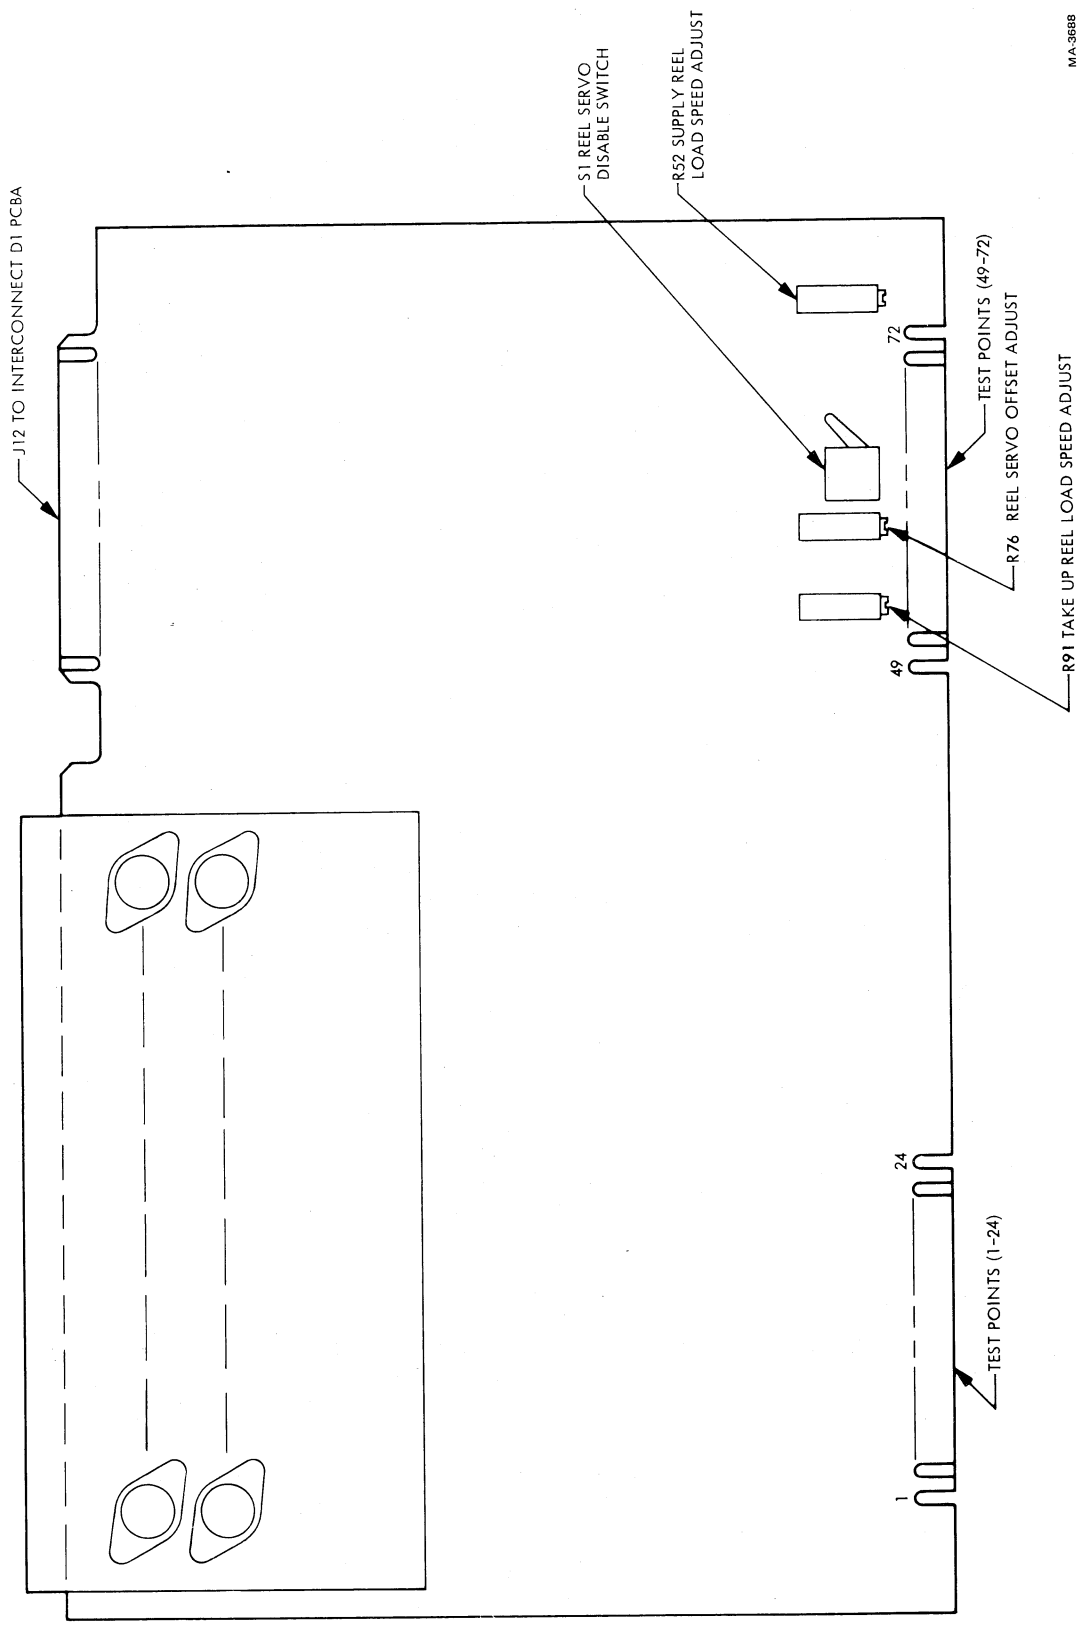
Control M2 PCBA Adjustments and Test Points
